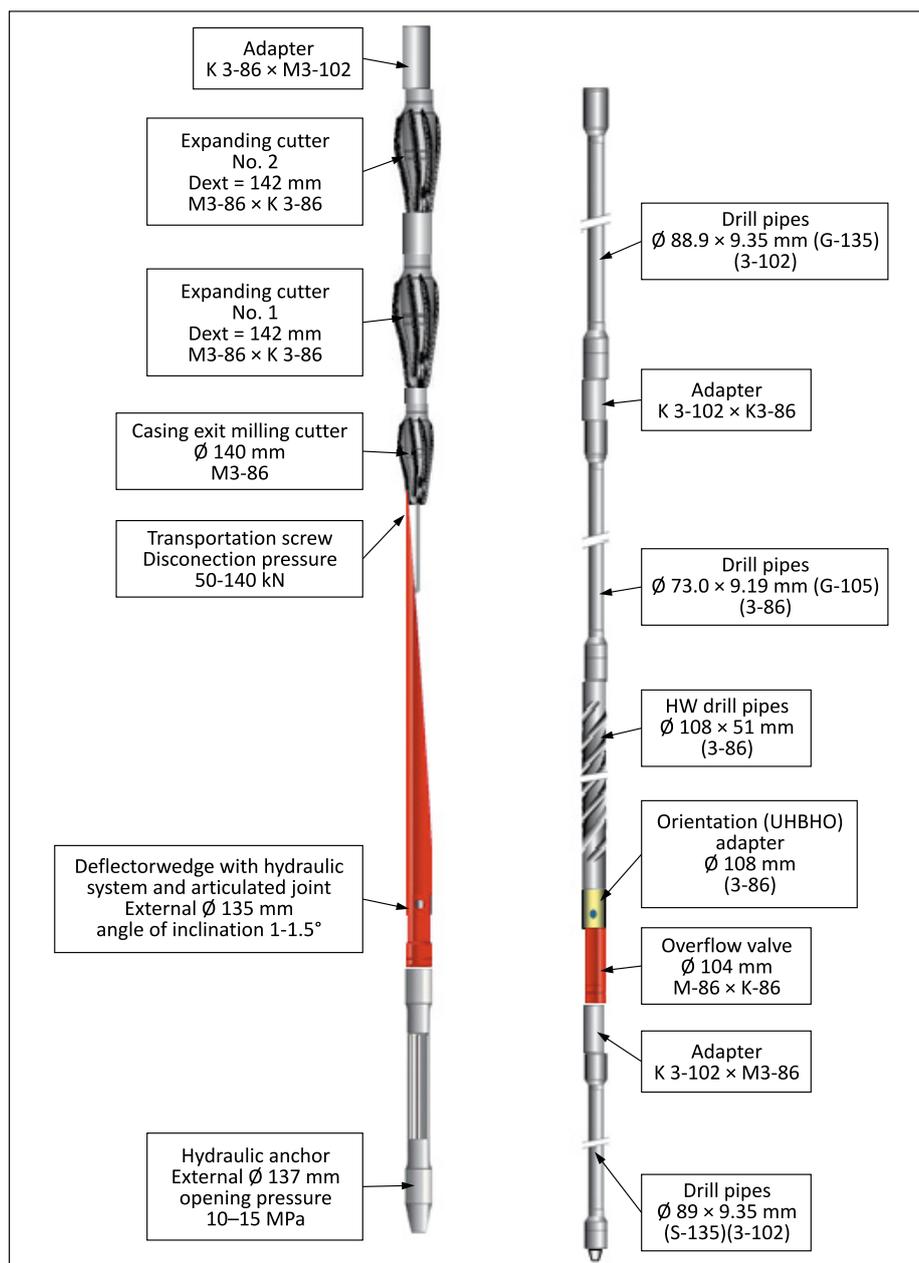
Scheme of assembly for cutting the opening in the casing string $\text{Ø } 168.3 \times 12 \text{ mm (D)}$
